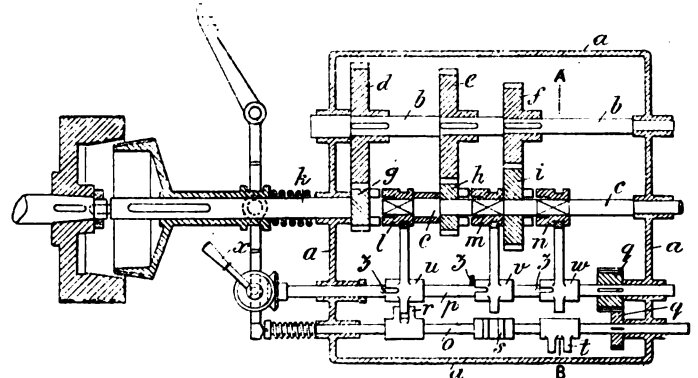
Sectional View of Langdon-Davies Change-Speed Gear.
